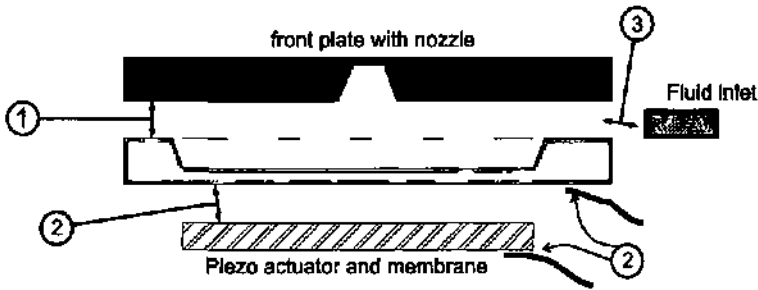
The assembly steps; 1) The two device halves are assembled together to form the fluid-chamber. 2) The piezo-actuator and the electrical contacts. 3) The fluid connection.
